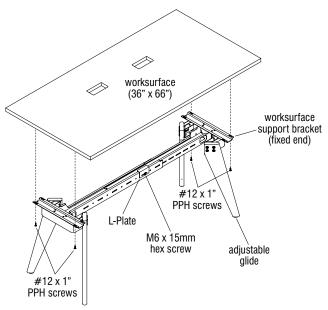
Single Beam Wood Leg Unit, Worksurface Installation
